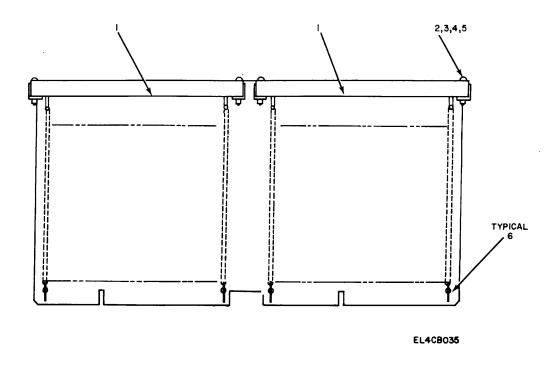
Special Tool, Extender Card Assembly SMD-532022. 16
